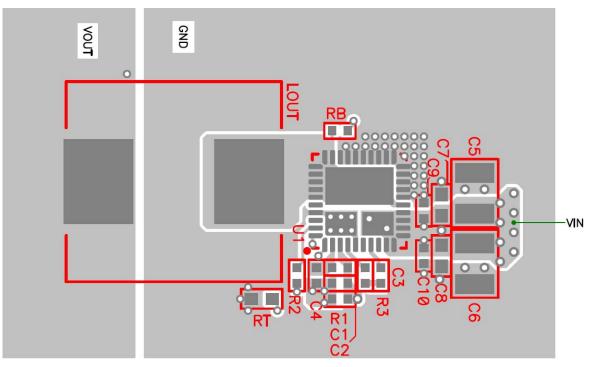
Single Phase DrMOS PCB Layout Example (Top Side View) (for DrMOS Design support a customer PCB layout guide is available upon request)
